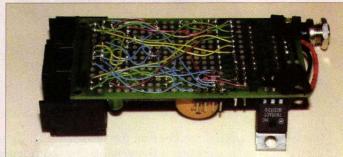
Bottom view. Point-to-point wiring is a bit tight, but not too bad.
